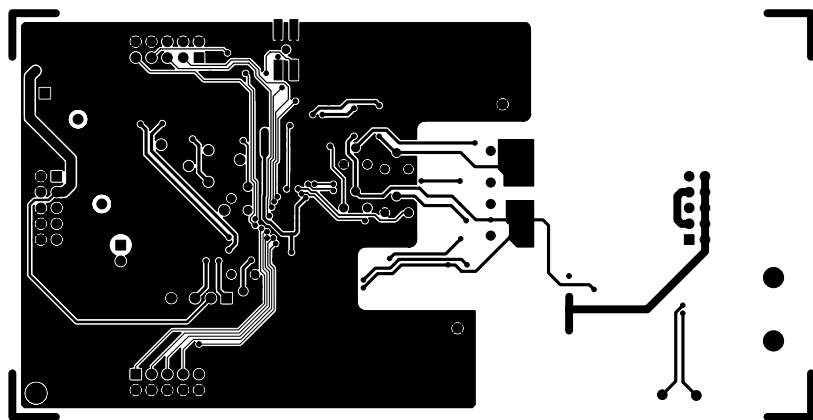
Si321xDCQ-EVB with Discretes Solder Side
